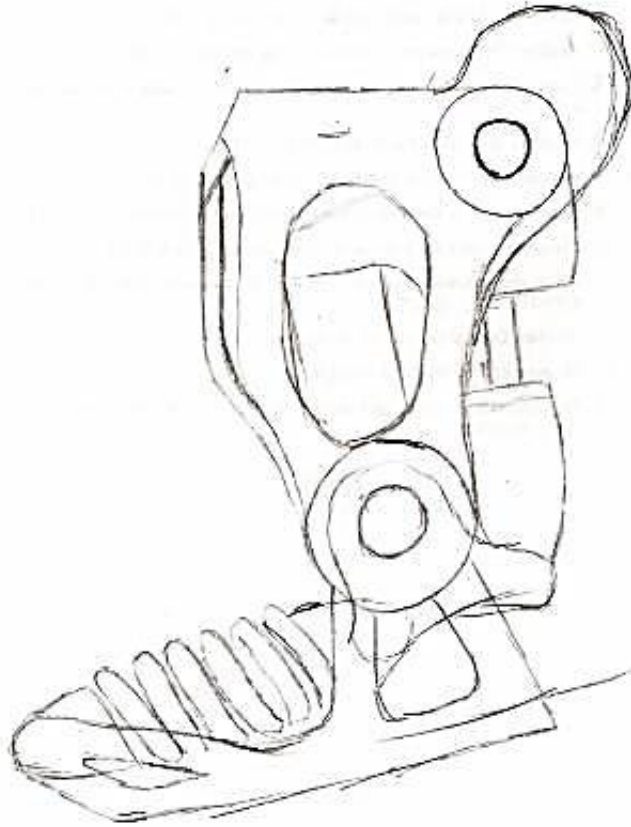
FINAL COMPONENT LAYOUT.
